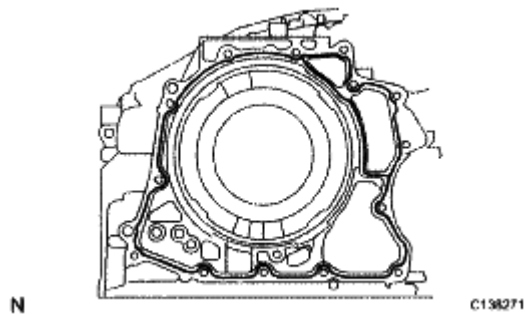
Identifying Rear Transaxle Cover Sub-Assembly And Transaxle Case
